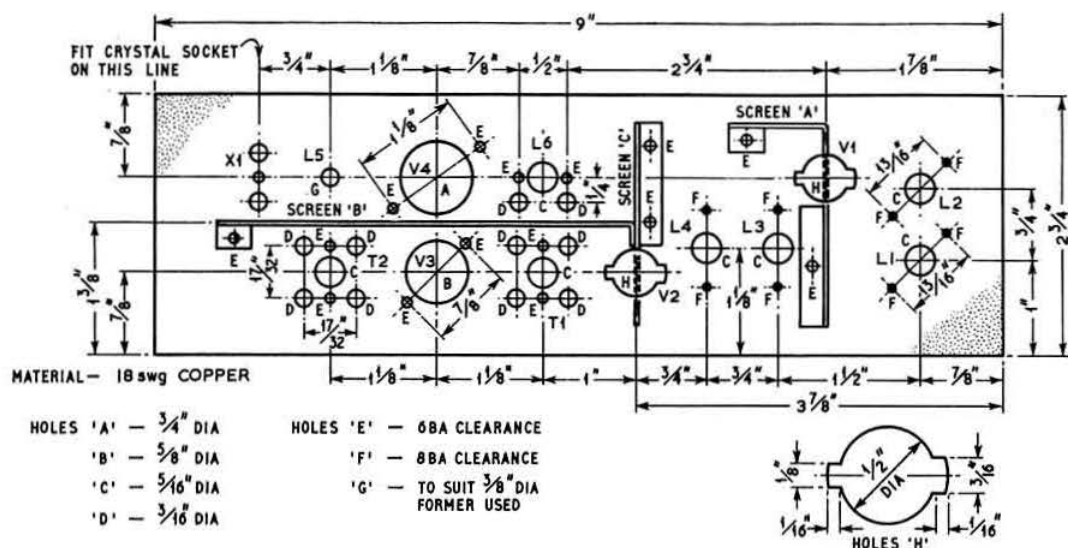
Dimensions of the chassis plate. This should be cut from 18 s.w.g. copper sheet.
